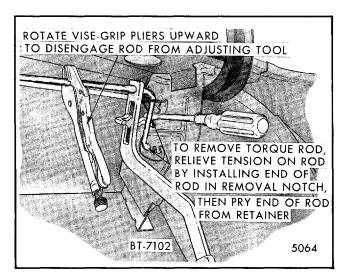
Rear Compartment Torque Rod Removal - Oldsmobile E Styles
